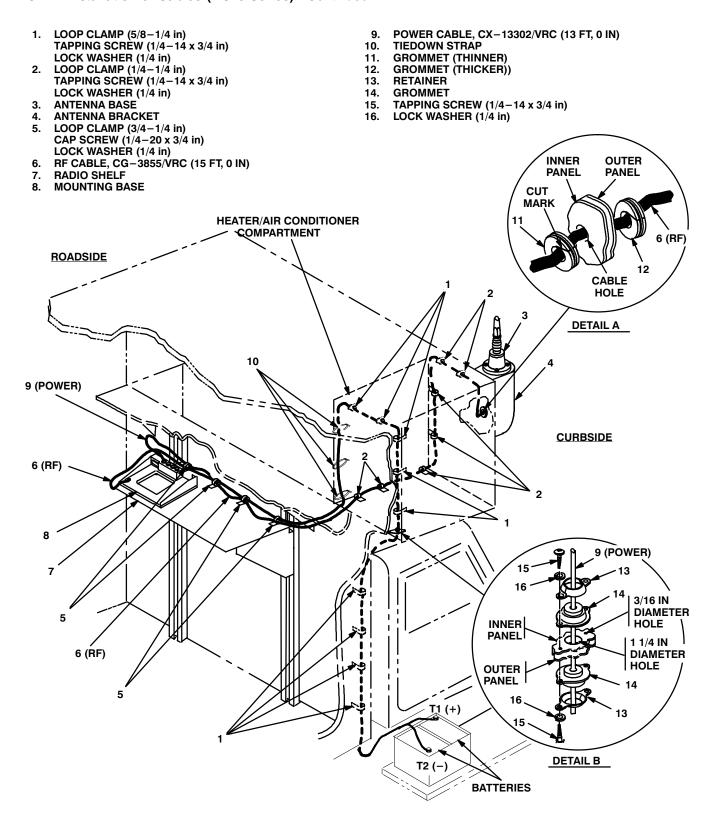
(1). Cable Installation - M820: RF and Power Cabling
